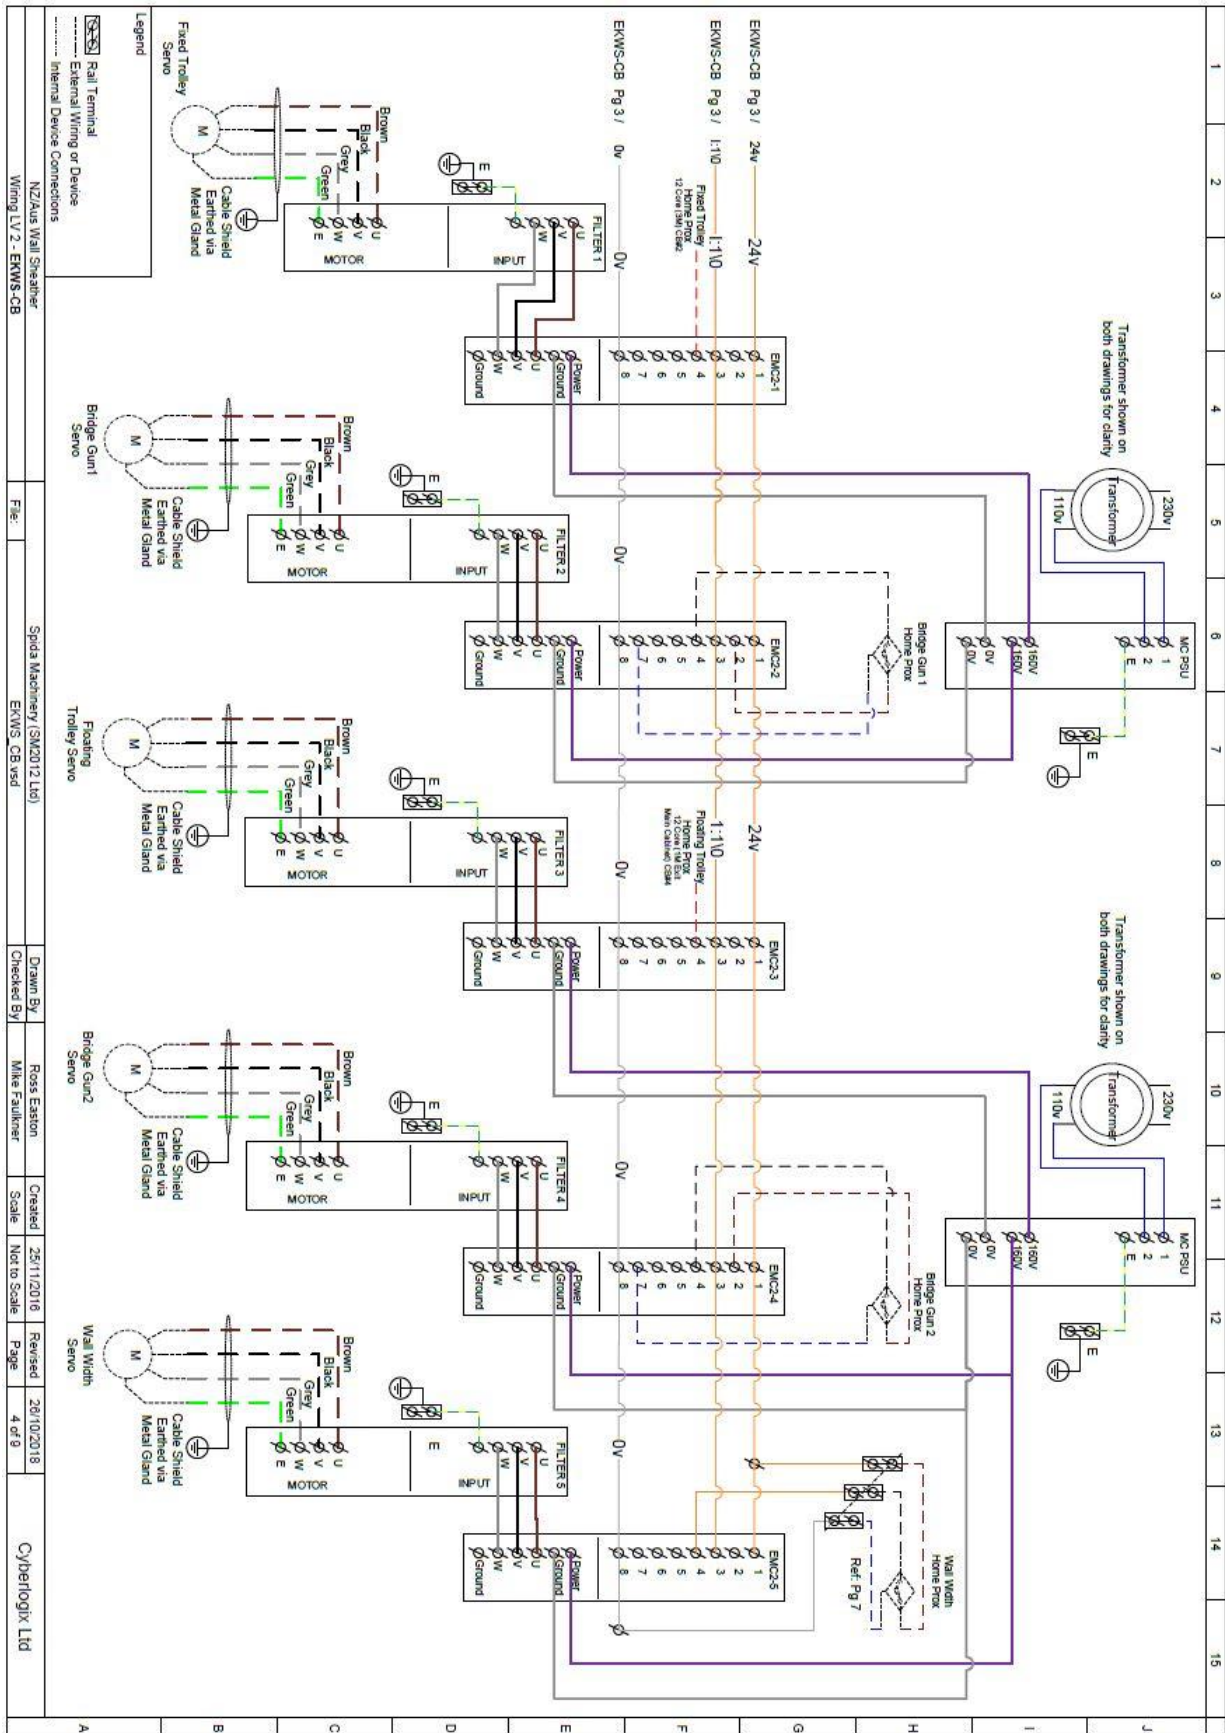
, Spida Auto Sheather Electrical Drawings NZ/AU part 4
